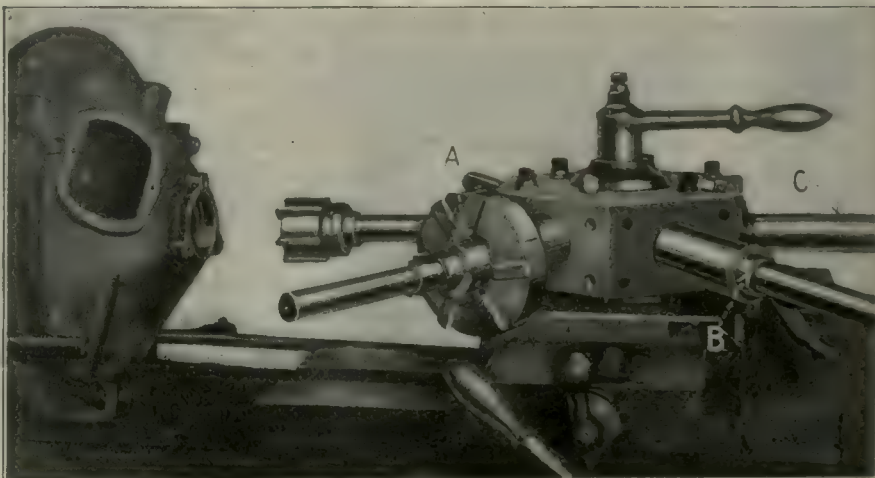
TURRET LATHE OPERATIONS ON THE CLUTCH HOUSING
